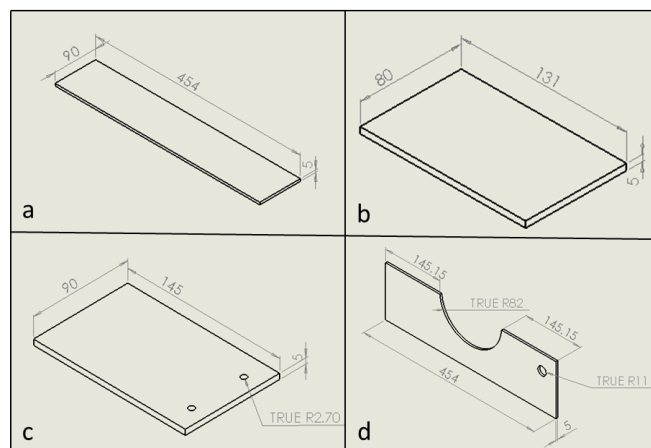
Isometric view of the coil housing parts. (a) Bottom panel. (b) Side panel. (c) Top panel. (d) Front panel. Dimensions given in mm.
